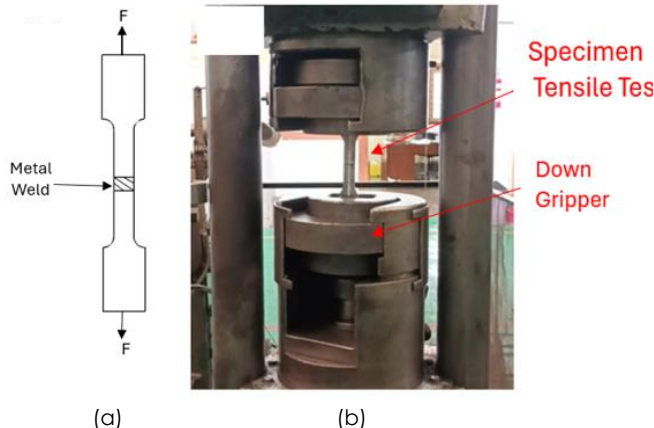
Set up of tensile test, [a] fracture mode, [b] tensile test process
